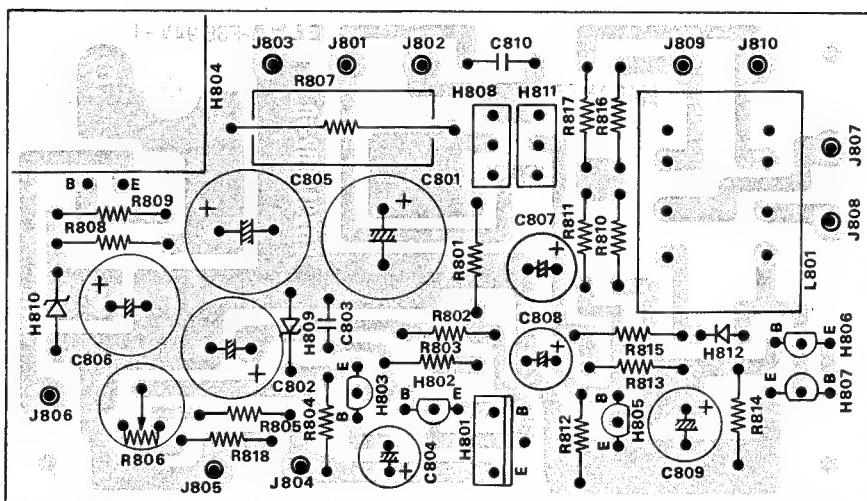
Power Supply and Protection Relay Circuit Assembly P800 Component Locations
